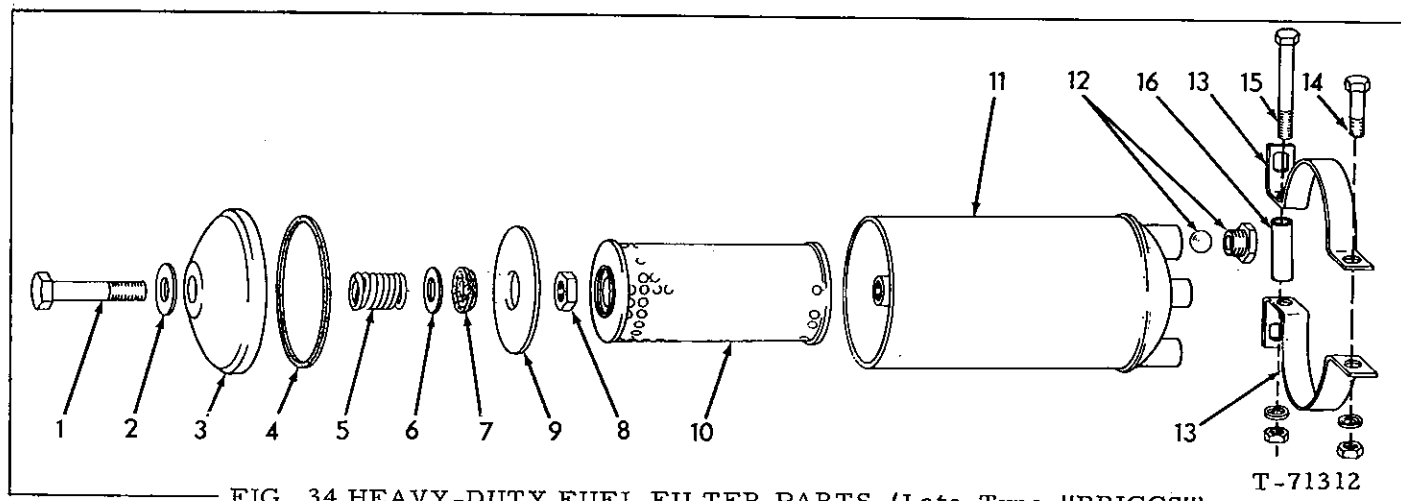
HEAVY-DUTY FUEL FILTER PARTS (Late Type "BRIGGS")
